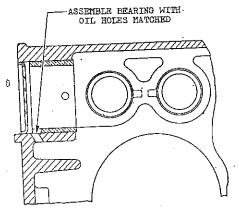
Installing rear camshaft bearing on 239, 257, 286, 331, 400 and 450 engines
